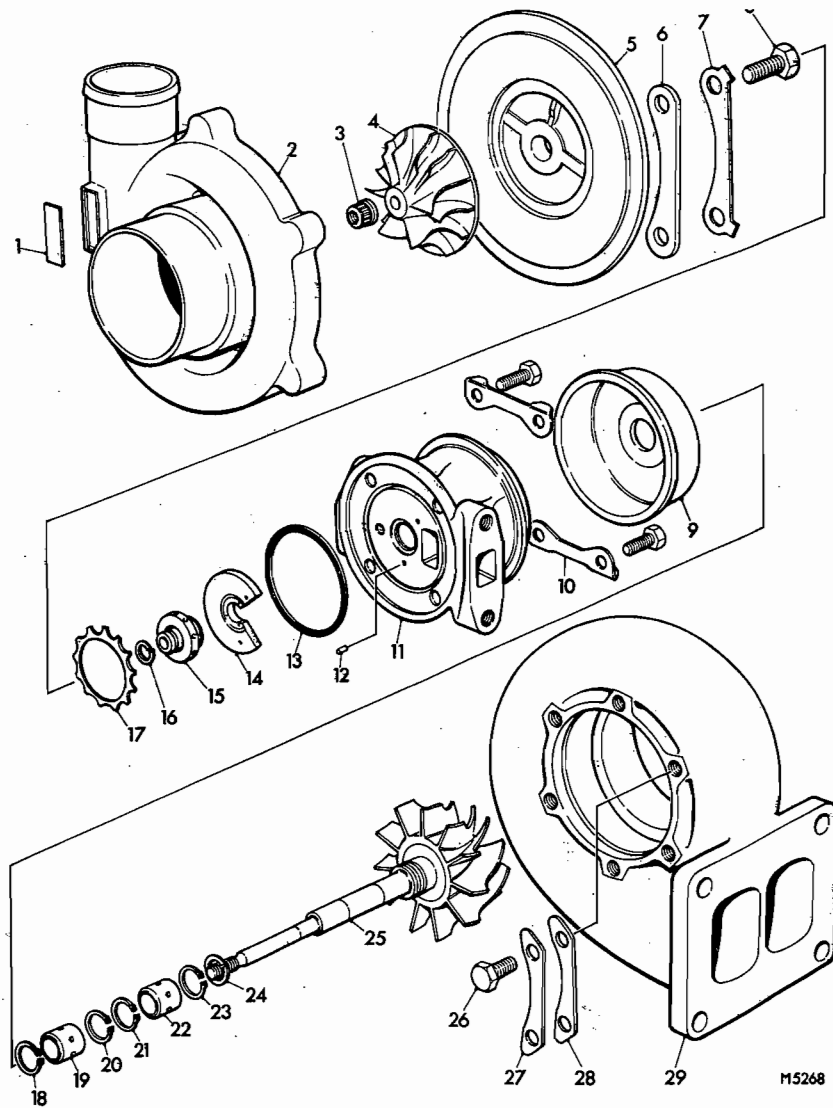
EXPLODED VIEW OF TURBOCHARGER
